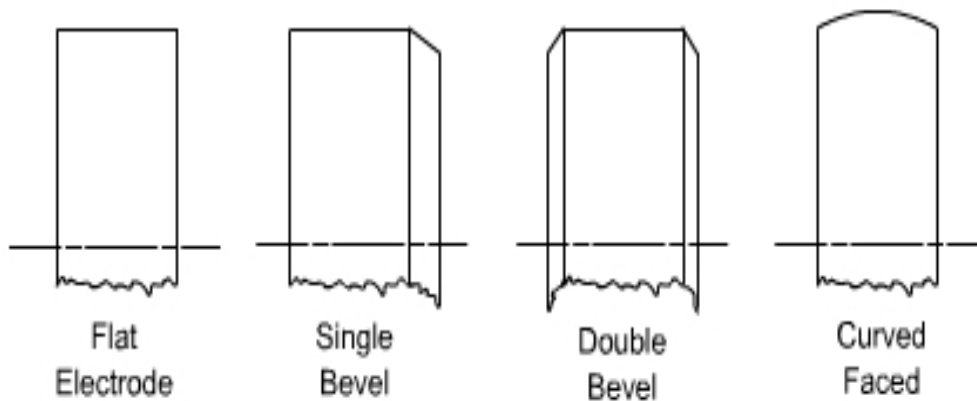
Electrode Shapes of Seam Welding
